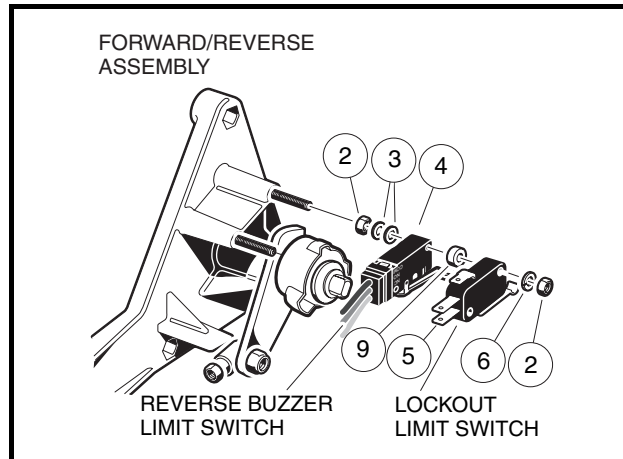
Lockout Cam and Reverse Buzzer Limit Switches
